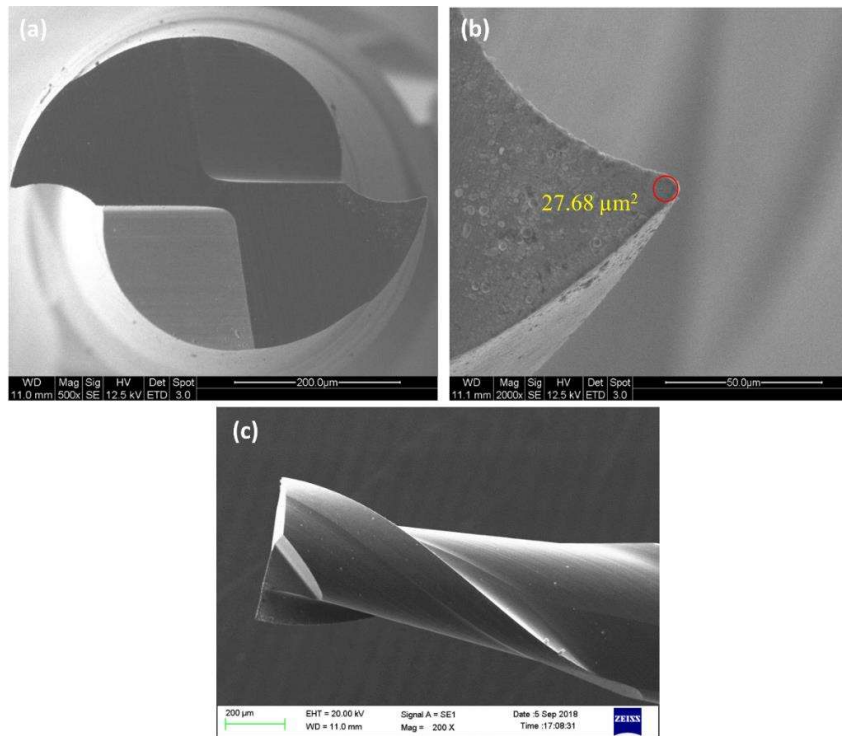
SEM images of fresh AlTiN coated WC micro endmill (a) bottom view, (b) cutting edge radius, (c) side view
